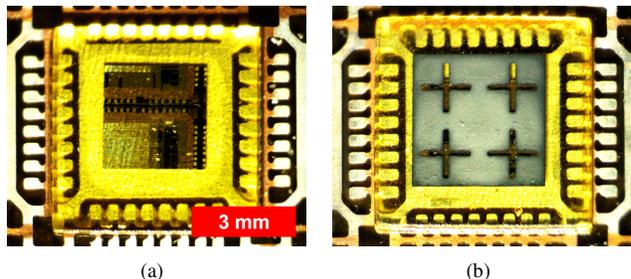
Proof-of-concept 3D-printed SLA encapsulations for wireless IC packaging: (a) bare encapsulation and (b) inkjet-printed FSS-integrated encapsulation.
